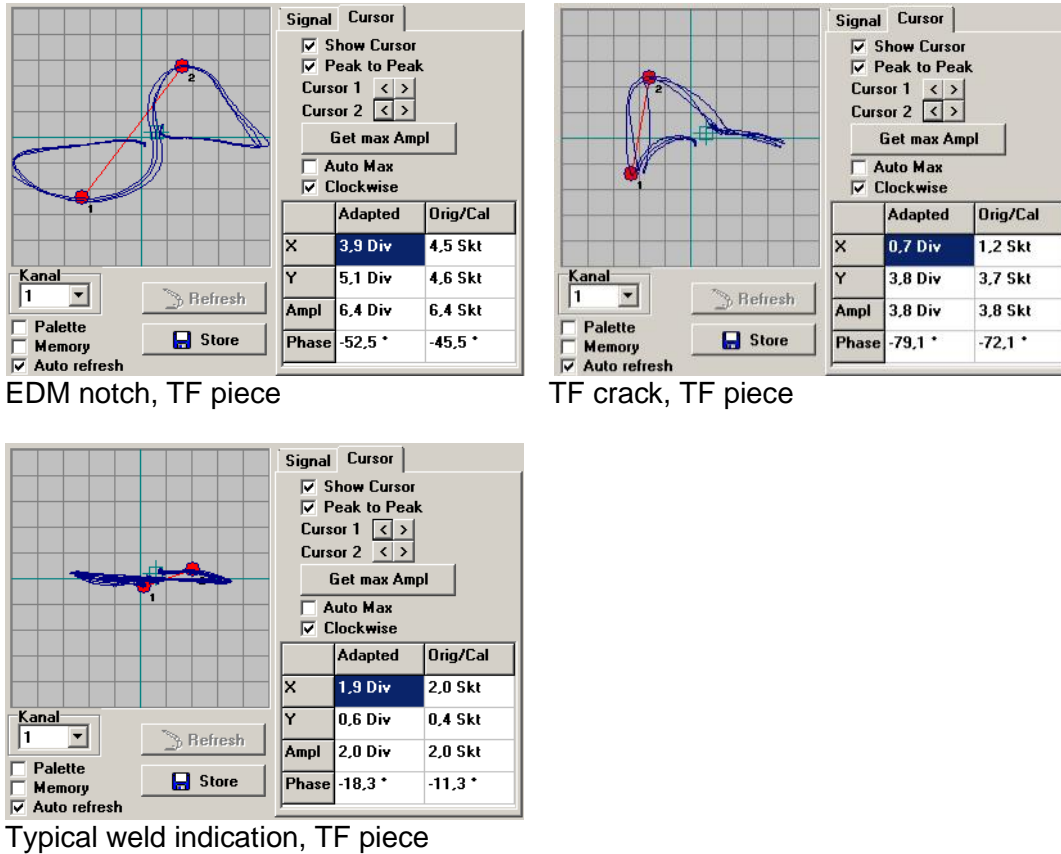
Impedance plane presentations of indications of a notch, fatigue cracks and welds in TF test piece, when differential pencil probe TMT DP21 was applied, frequency 200 kHz.
